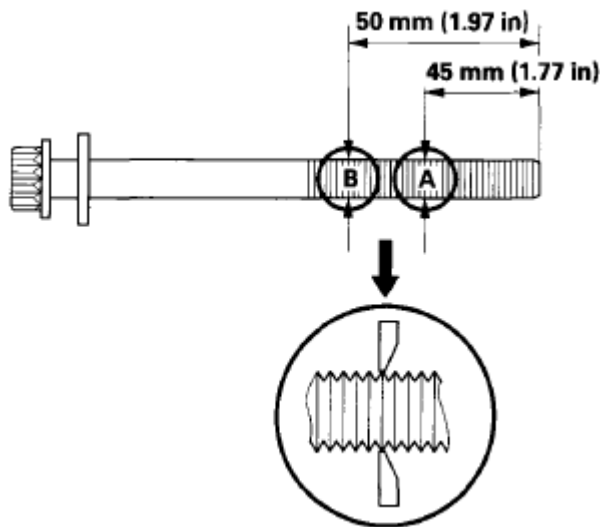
Measuring Diameter Of Each Cylinder Head Bolt At Point A And Point B
